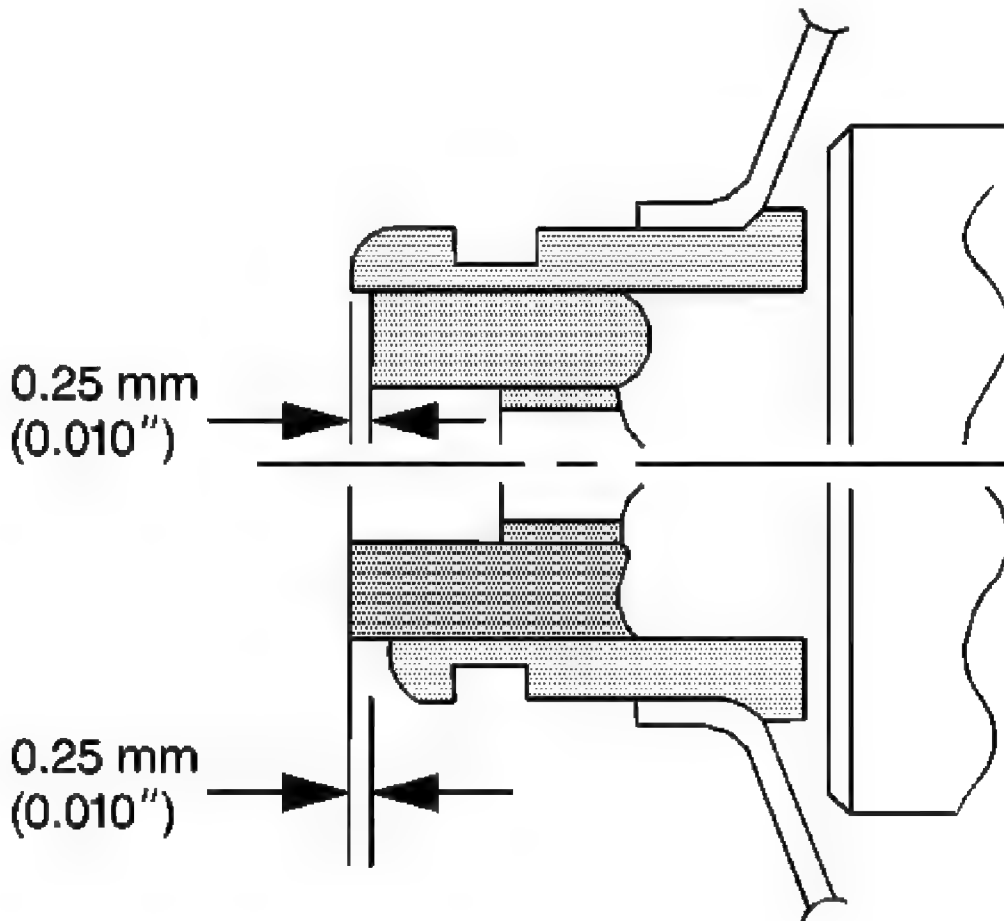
Measuring Axial Tolerance Of Power Steering Pulley On Pump
